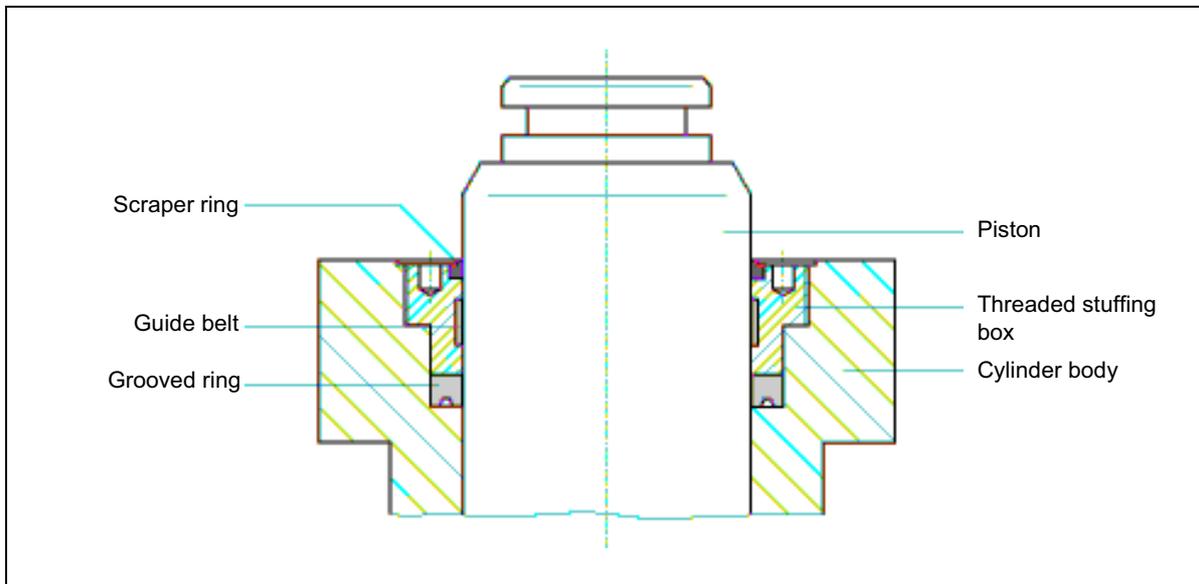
Hydraulic cylinder with threaded stuffing box: Mechanical construction
